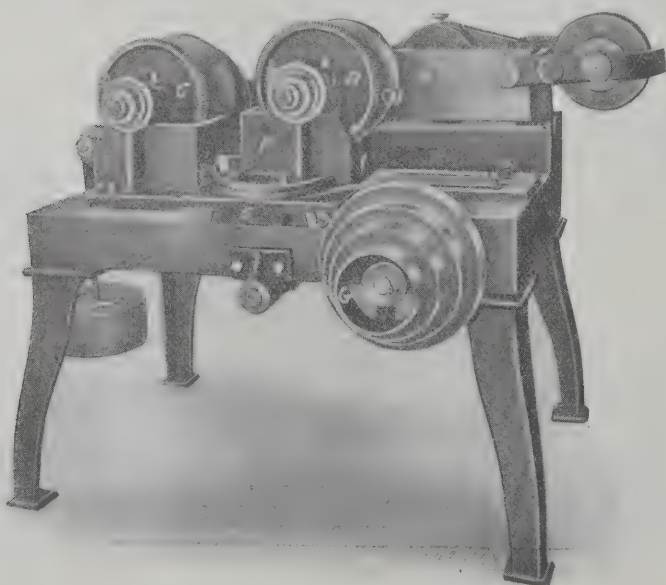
Driving Side of Machine, showing Adjustment of Follower Roll Bracket on Cutter Slide
